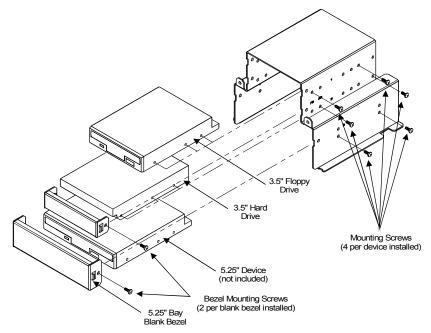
The Drive Carrier Bracket (Exploded View)
